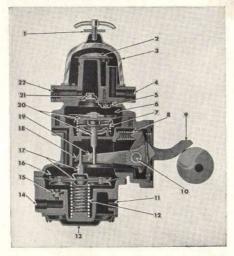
FUEL AND VACUUM PUMP ASSEMBLY
